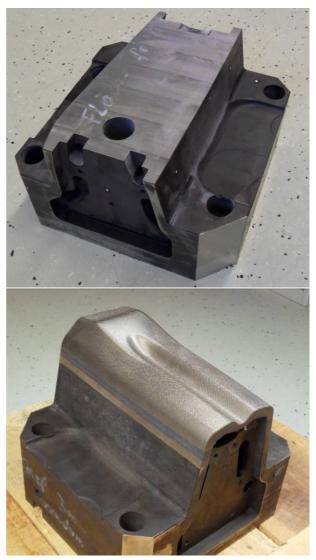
Tool insert – milled base body (top) and ready for finish-machining (bottom)
